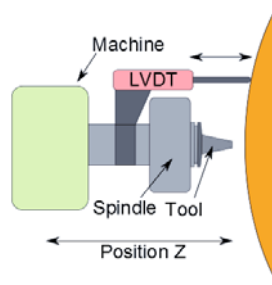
Schematic overview of the welding machine and its sensors. The Position Z sensor measures the spindle position relative to the machine, and the LVDT sensor measures the spindle position relative to the canister surface, but approximately 12 cm ahead of the tool.
